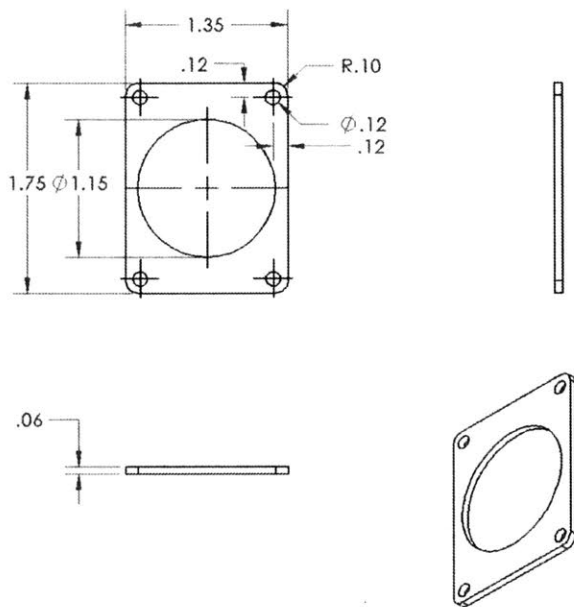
The design dimensions for the magnet holder. (unit: inch)
